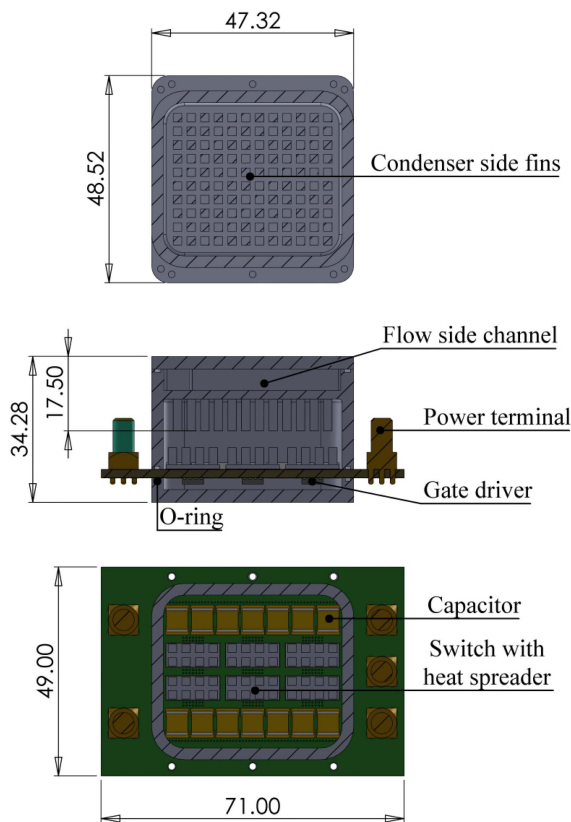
Proposed PCB layout and integrated fluid enclosure/heat exchanger for an immersion cooled EV motor drive.
